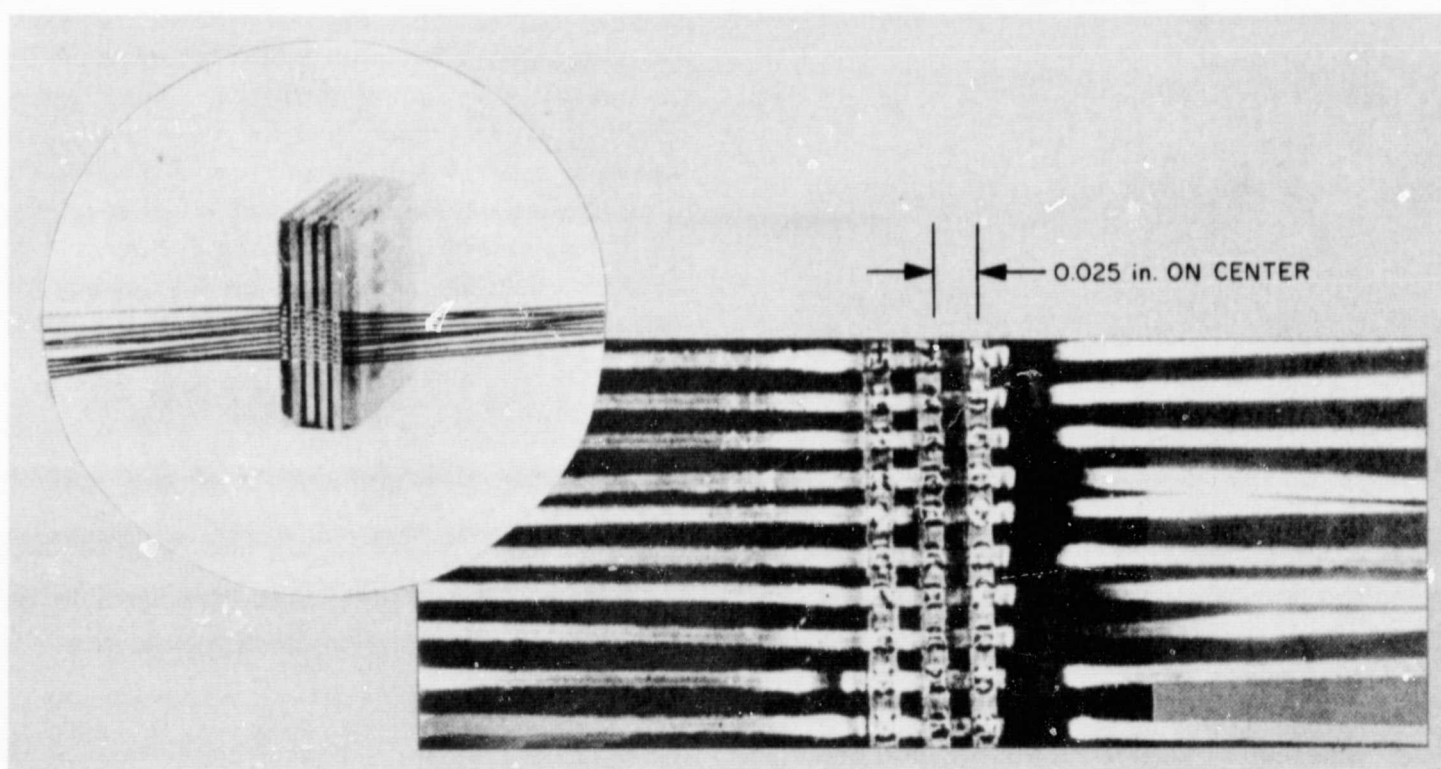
Riser wire sample weld (from Ref. 16)
